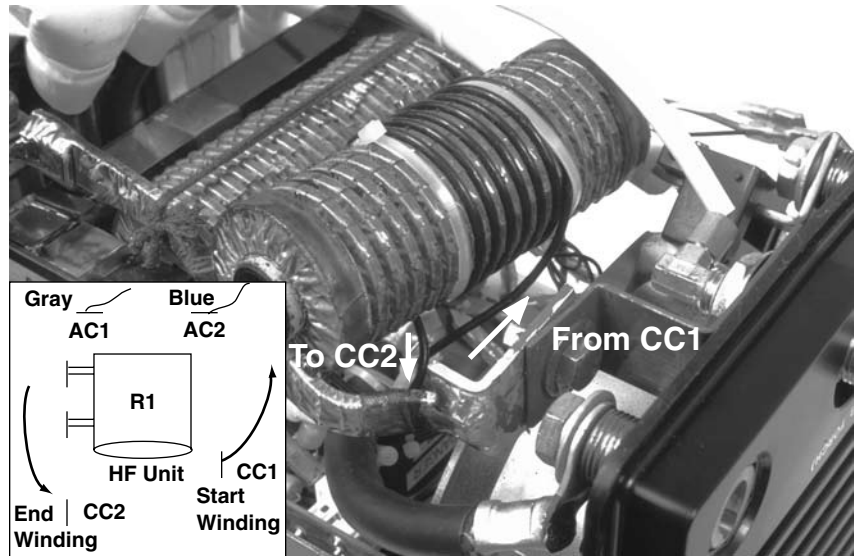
HF coupling coil winding onto Output Inductor Assembly
